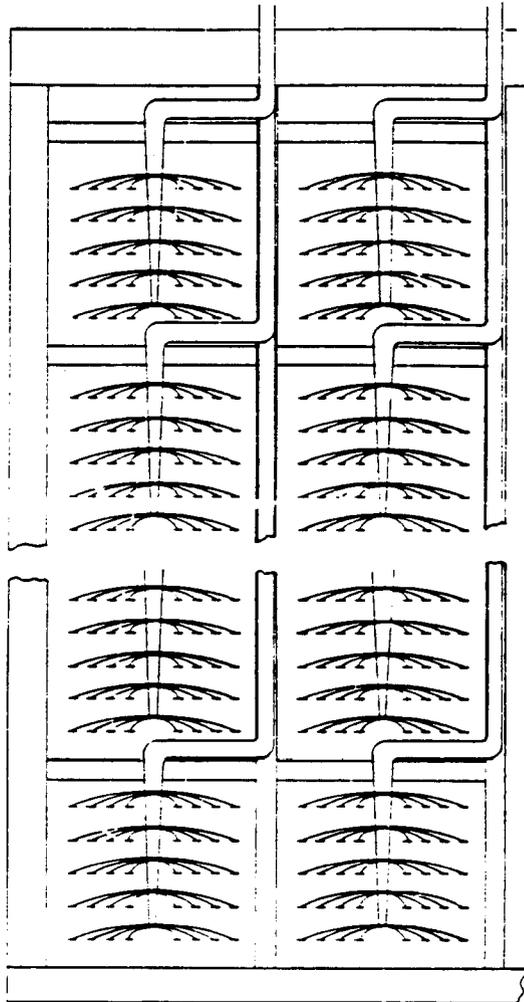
TYPICAL METHOD OF DRESSING TIE CABLE TO 302 TYPE CONNECTORS ON PROTECTOR FRAME
